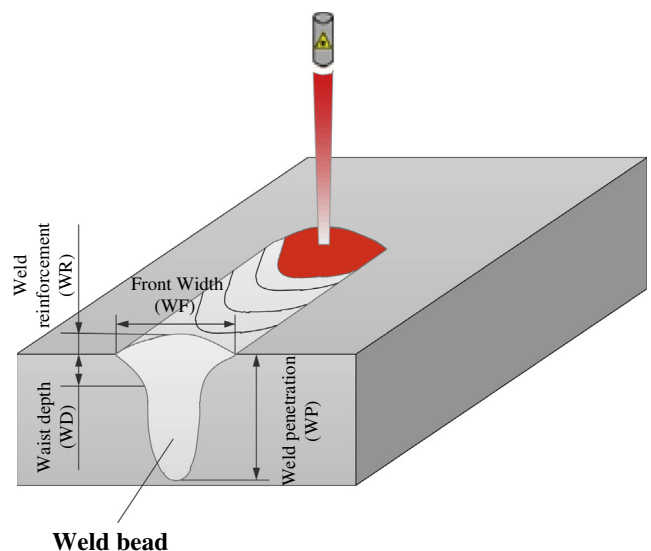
The schematic of weld bead in the fiber laser keyhole welding.
